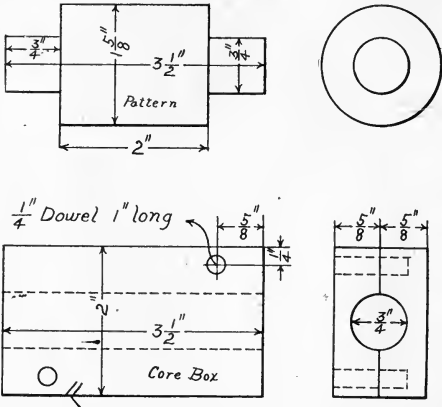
PATTERN AND CORE BOX FOR CYLINDER
